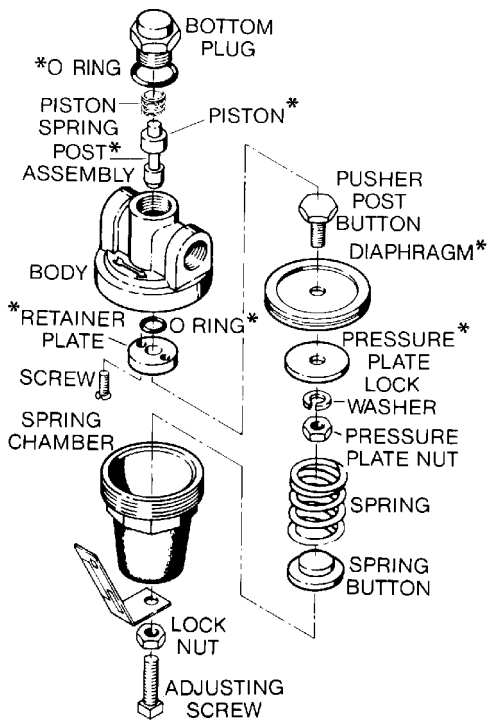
Pressure Regulator Valve (P/N 048059)
